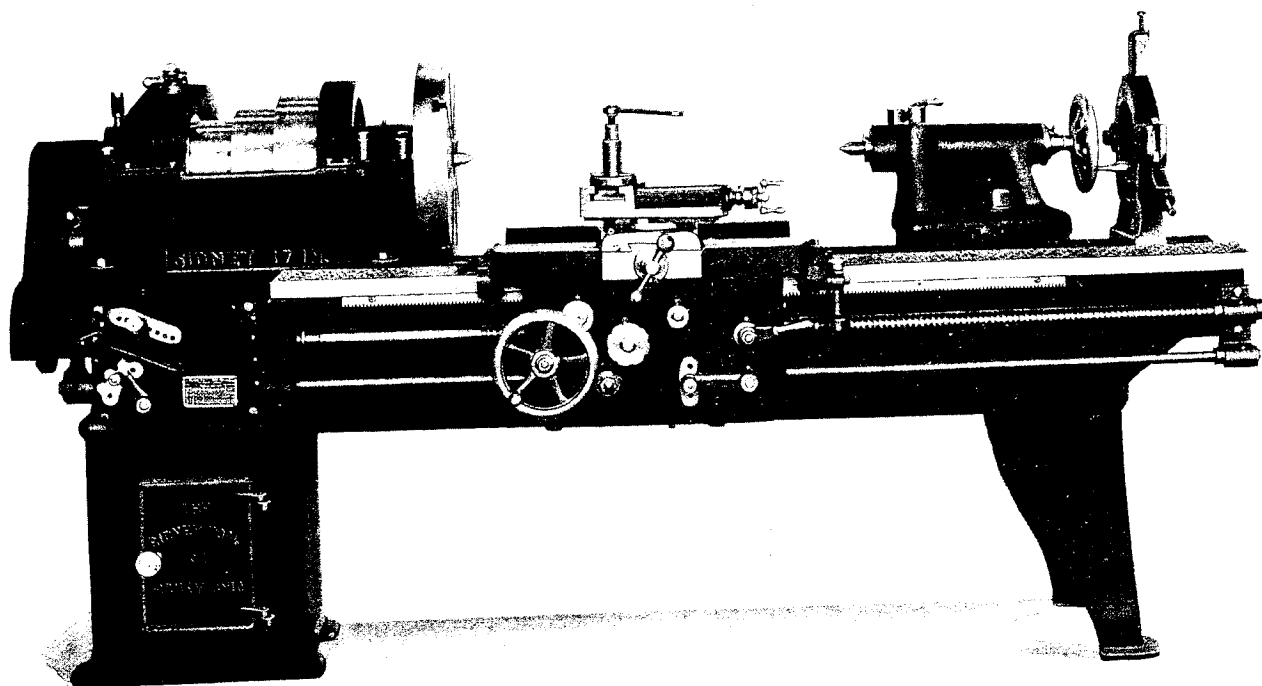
17" x 8" Sidney Heavy Pattern Quick Change Gear Engine Lathe.
